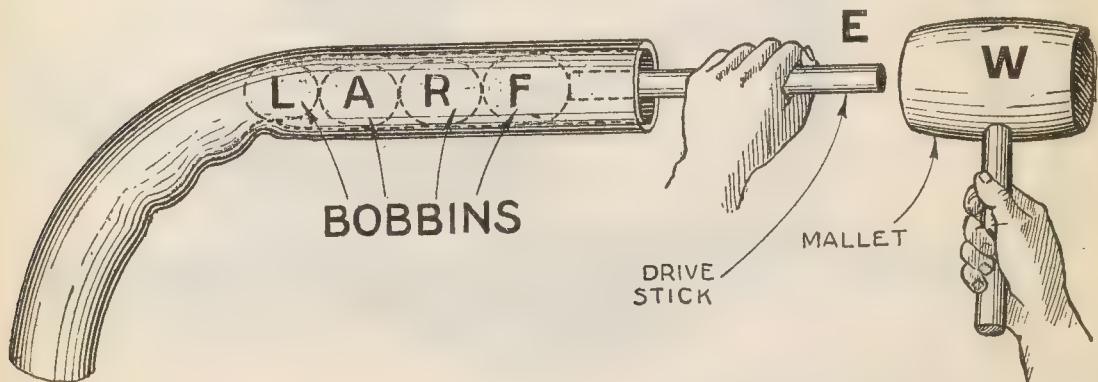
,362.—Application of bobbins in removing kinks formed in bending pipe. The bobbins L, A, R, F, progressively increasing in size, are forced through the pipe by hitting the drive stick E, with the mallet W.
